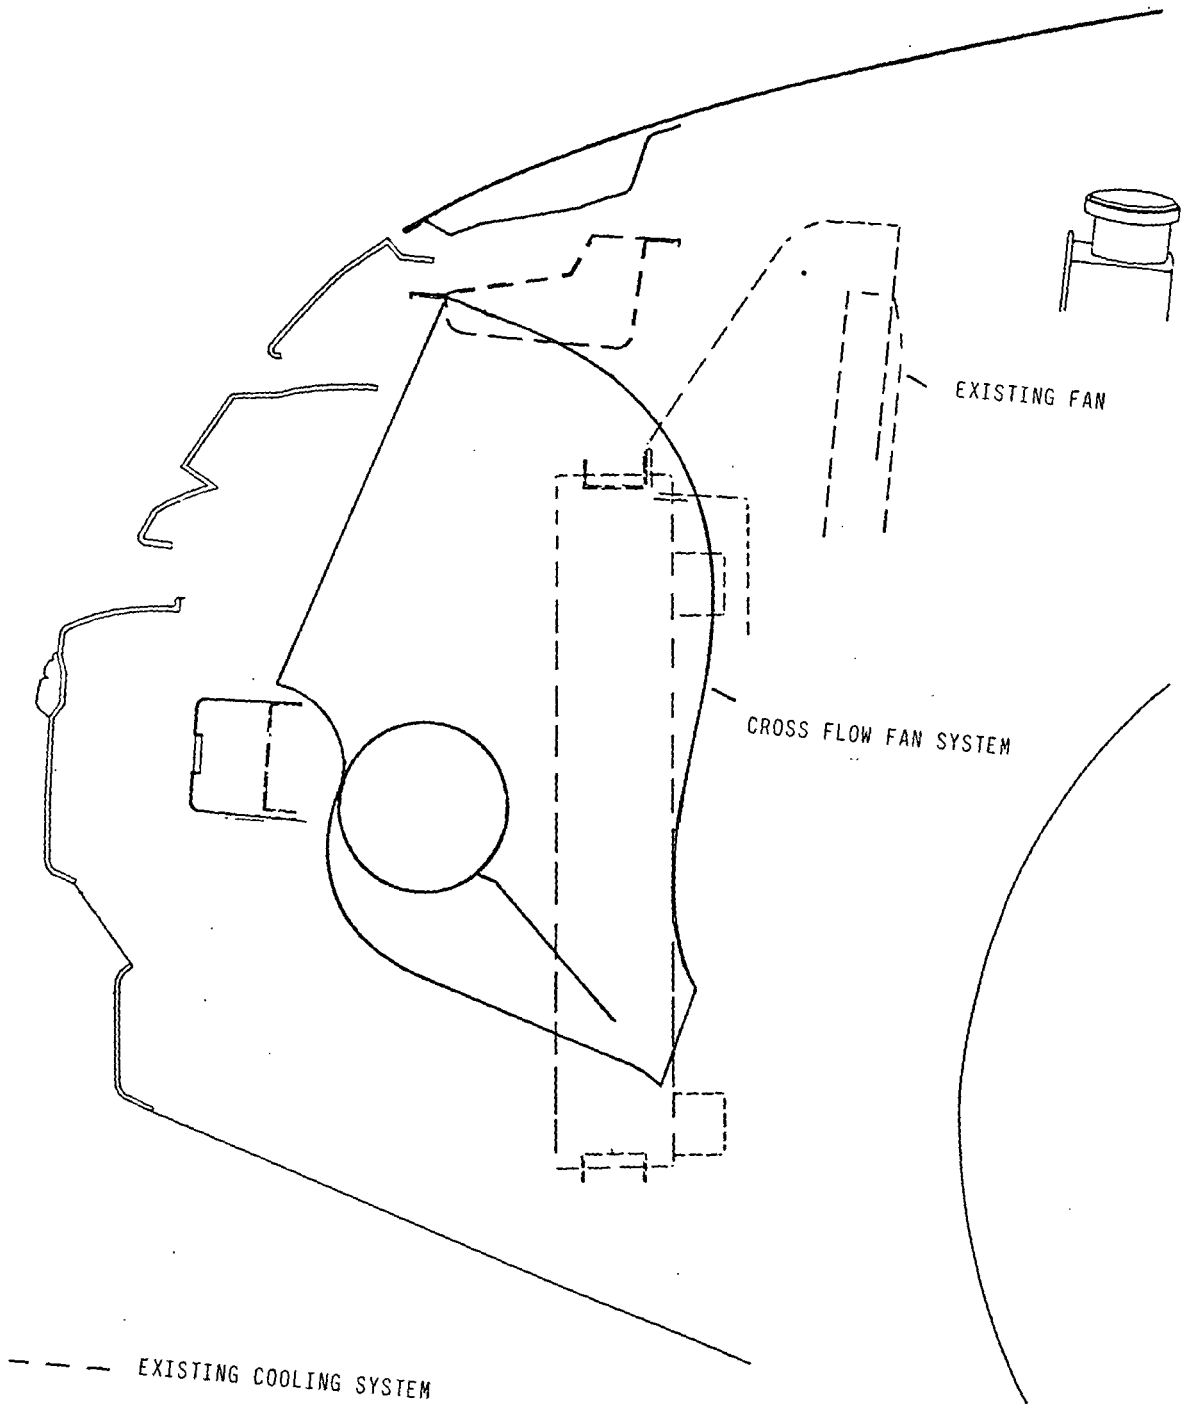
FRONT OF SIDE VIEW OF SIERRA 1.6 OHC
